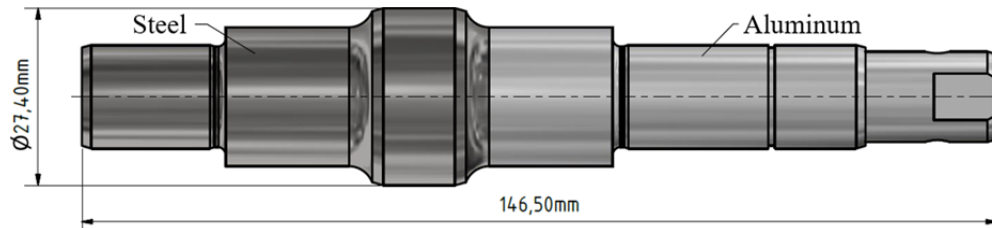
Hybrid shaft example manufactured by Tailored Forming
